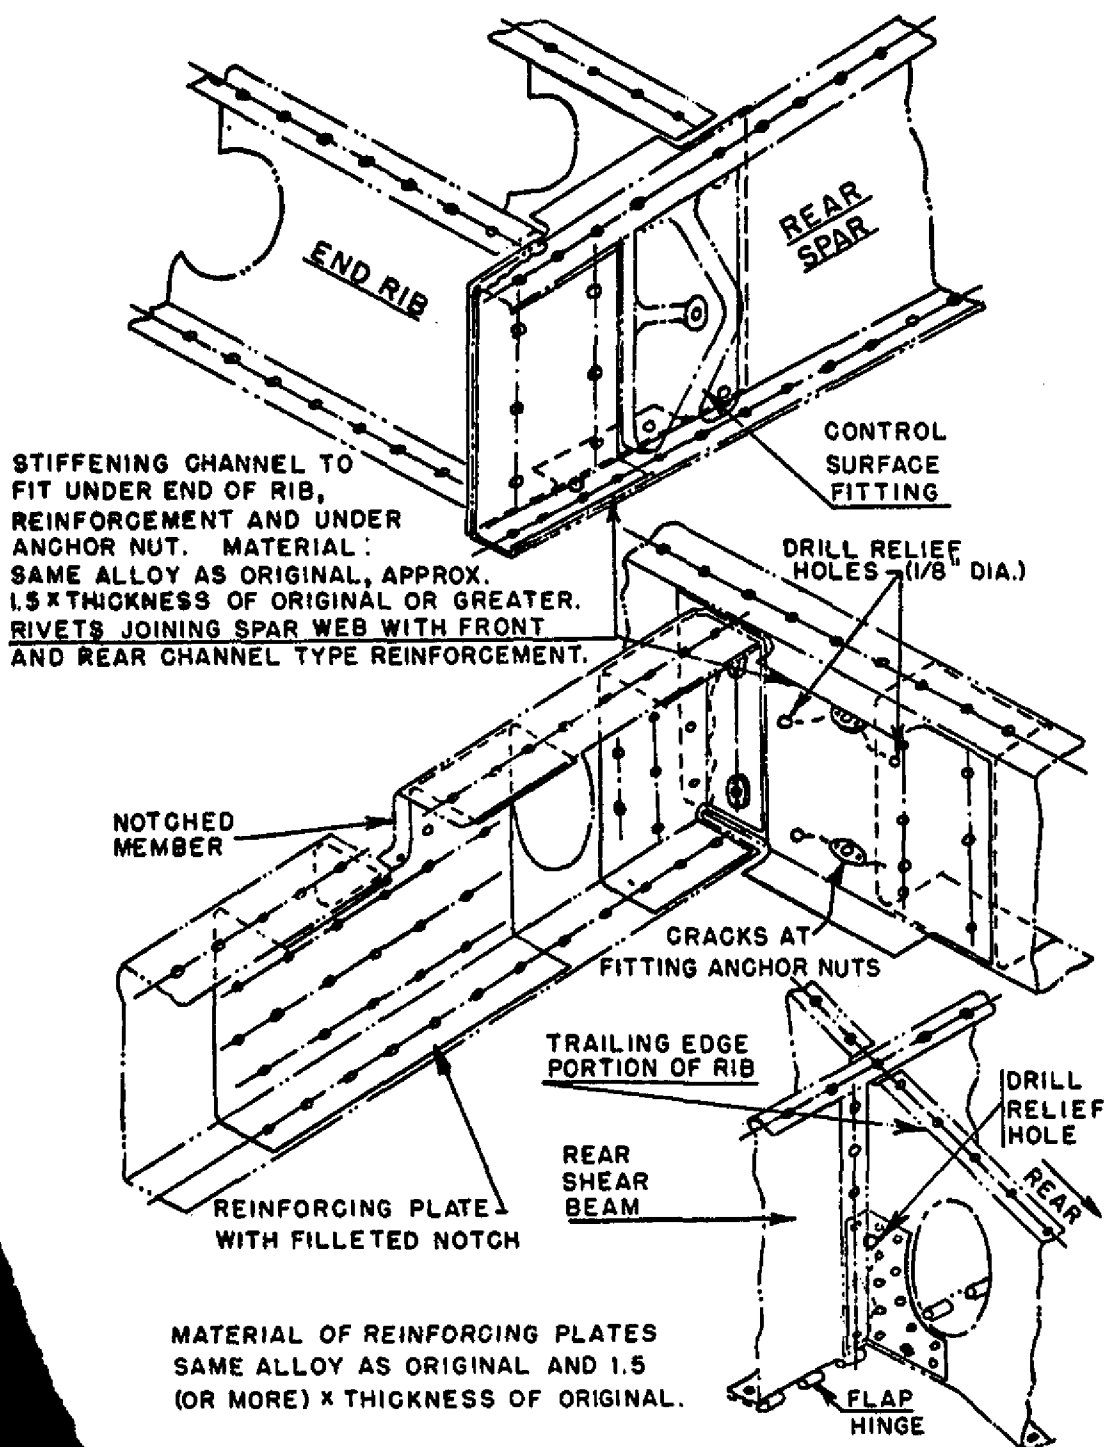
Typical methods of replacing cracked members at fittings.
